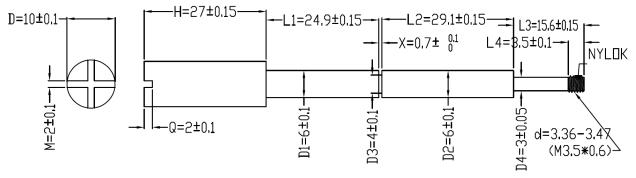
Drawing of Wujiang Screw MDCM0359733N
